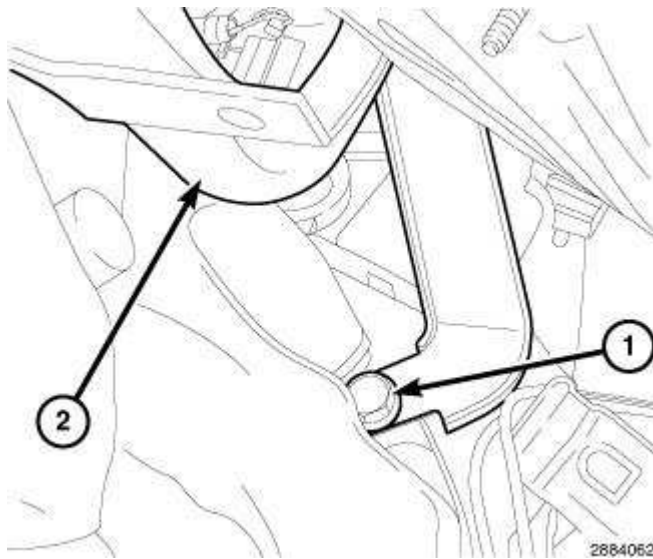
Upper Transmission-To-Engine Bolt & Transmission Oil Level Indicator Tube
